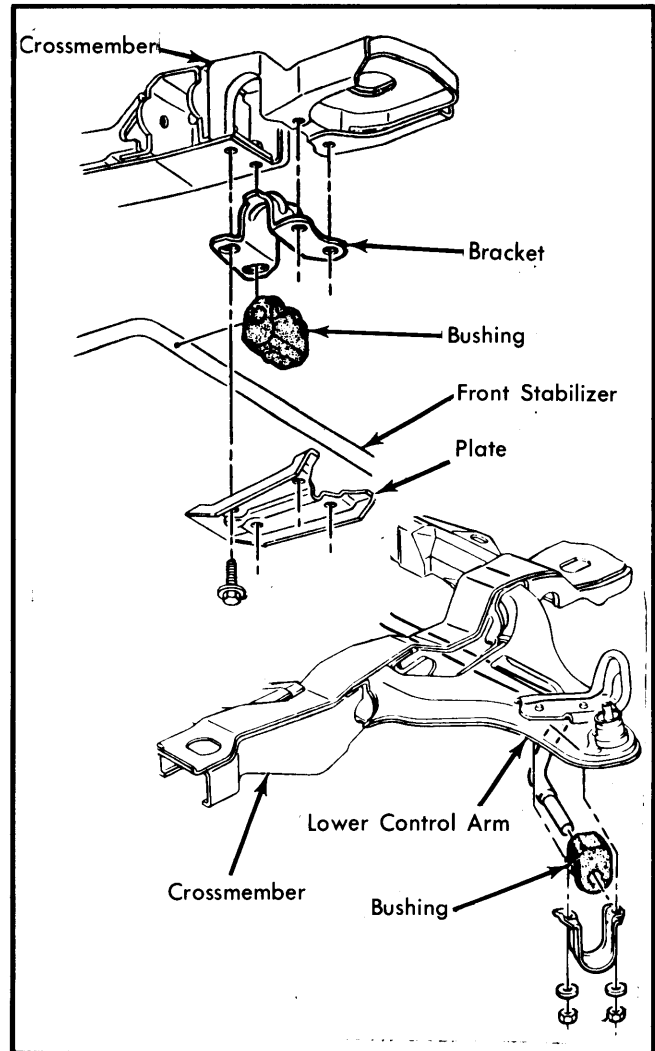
Exploded View of Stabilizer Bar and Mounting Points
